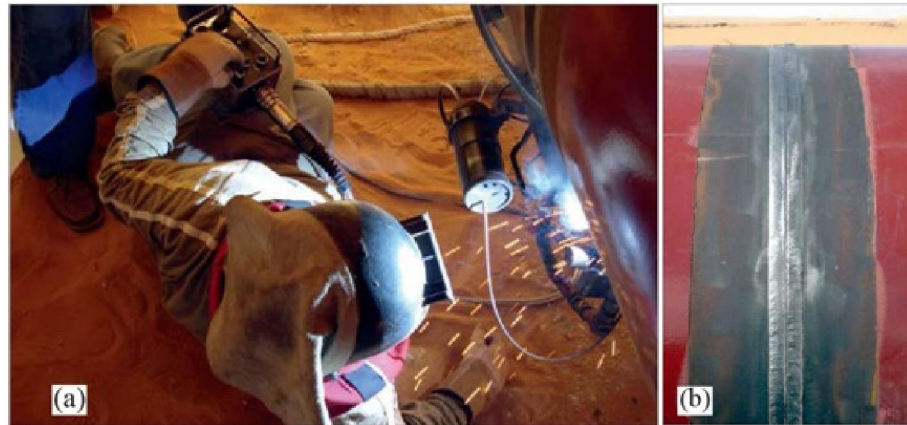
(a) Welding of hot pass (b) Typical weld appearance of a mechanized weld joint [81]
